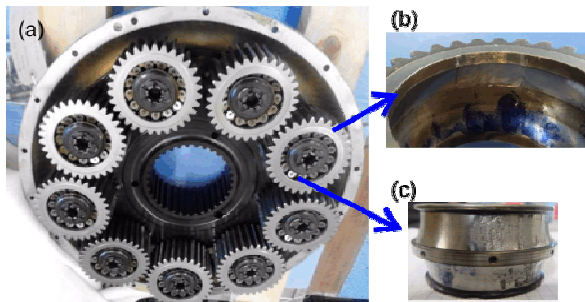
(a) Second stage epicyclic gears; (b) Slot across the bearing outer race; (c) Inner race natural spalling
